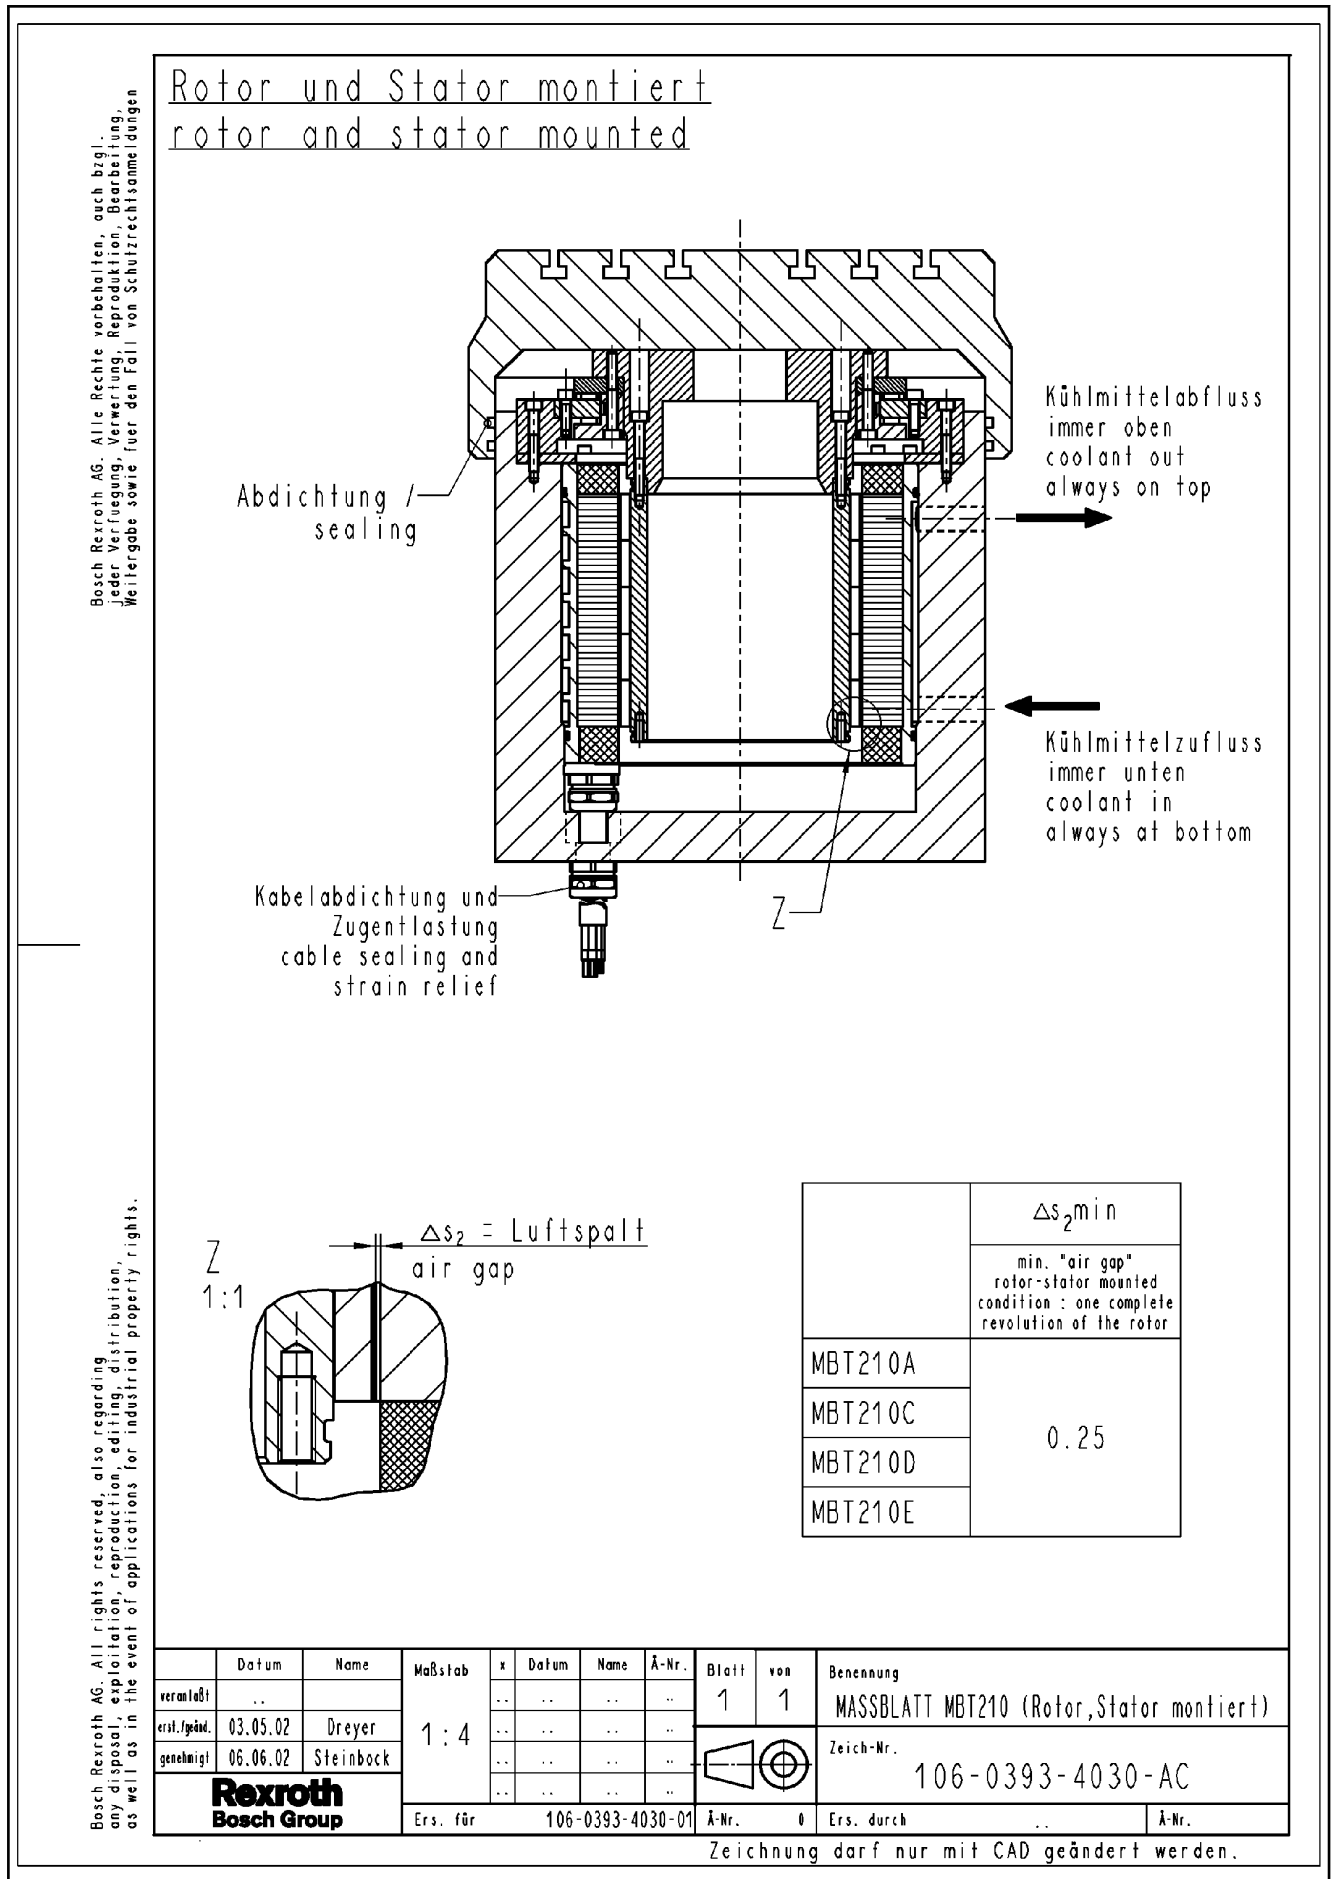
Dimension sheet for frame size 210, rotor and stator, mounted
